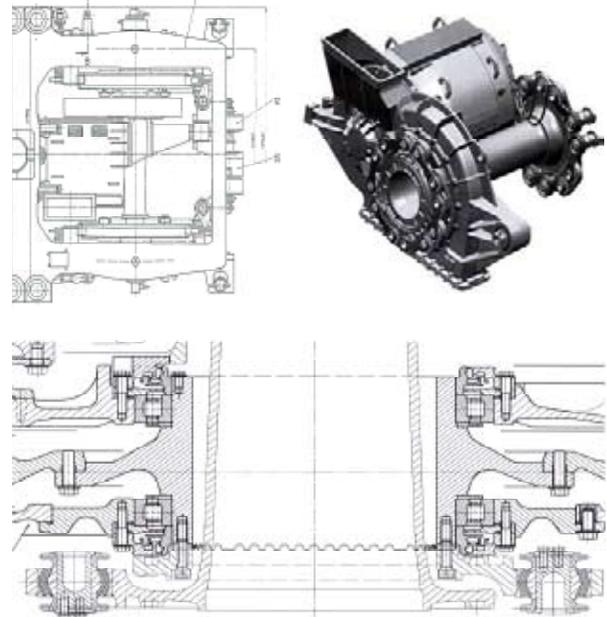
Integrated unit IGA and its installation in bogie frame of locomotive DB 120; a detail section of complicated joint of hollow joint shaft with hollow toothwheel
